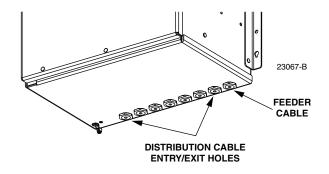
Feeder Cable Bottom Entry/Exit Hole
